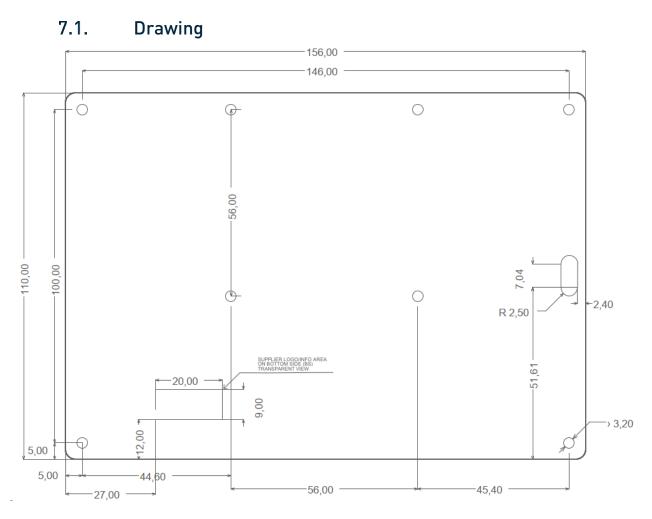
Board Mechanical Drawing (dimensions are in millimeters)
